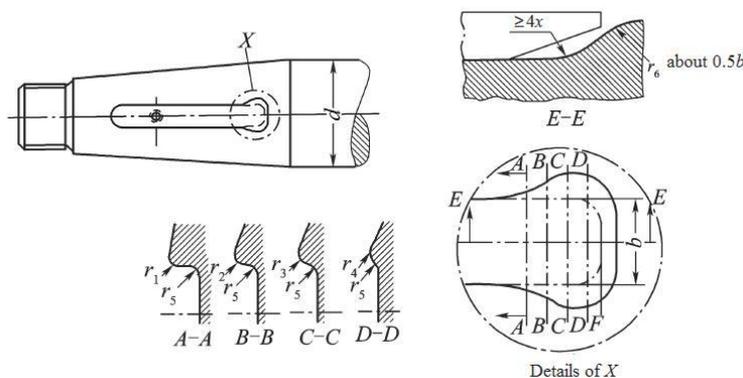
Keyway Shape on Propeller Shaft
